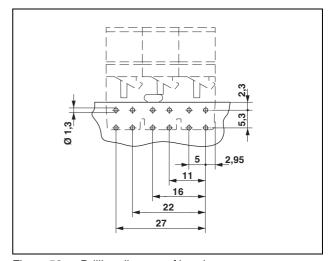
Drilling diagram of header HSCH 2,5-3U/12 9005
